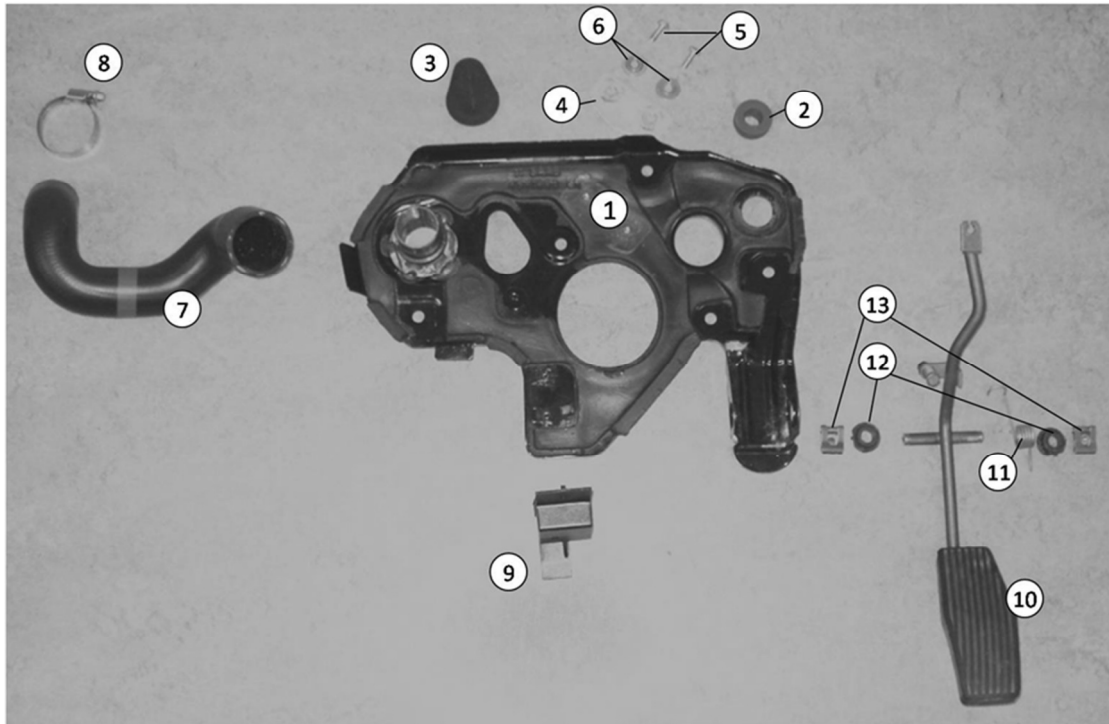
Overview of the different parts included in the experiment of paper III, together forming a pedal unit
